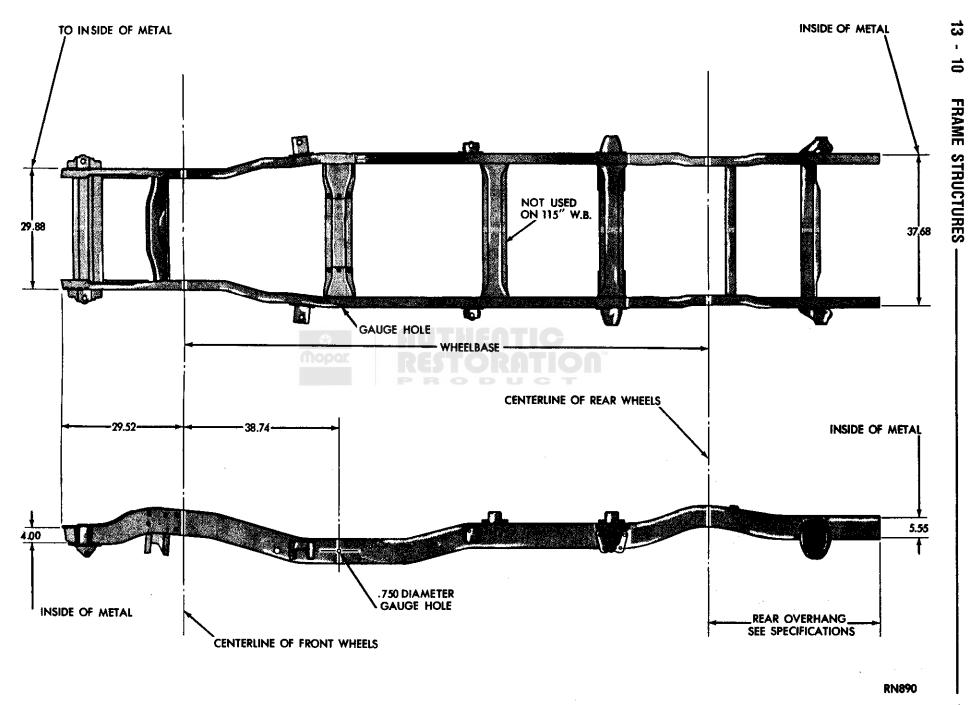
Frame Dimensions (AD5, 6 and 7)
